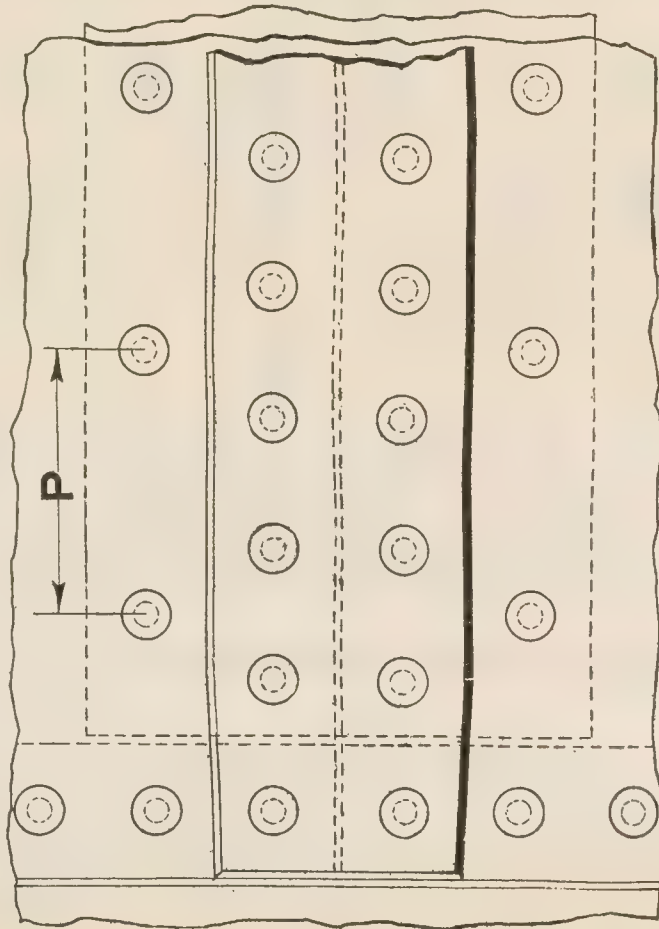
,726.—Example of butt and double strap joint, double riveted.
